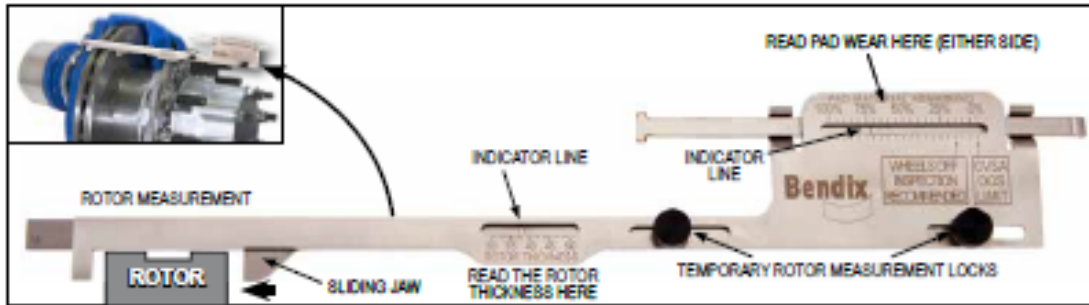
PAD AND ROTOR WEAR GAUGE TOOL
